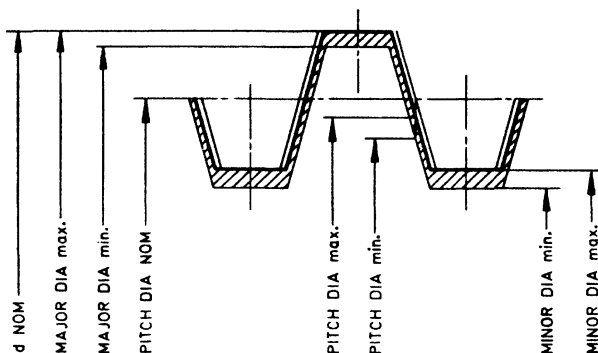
EXTERNAL THREADS WITH TOLERANCE POSITION *h* FOR
